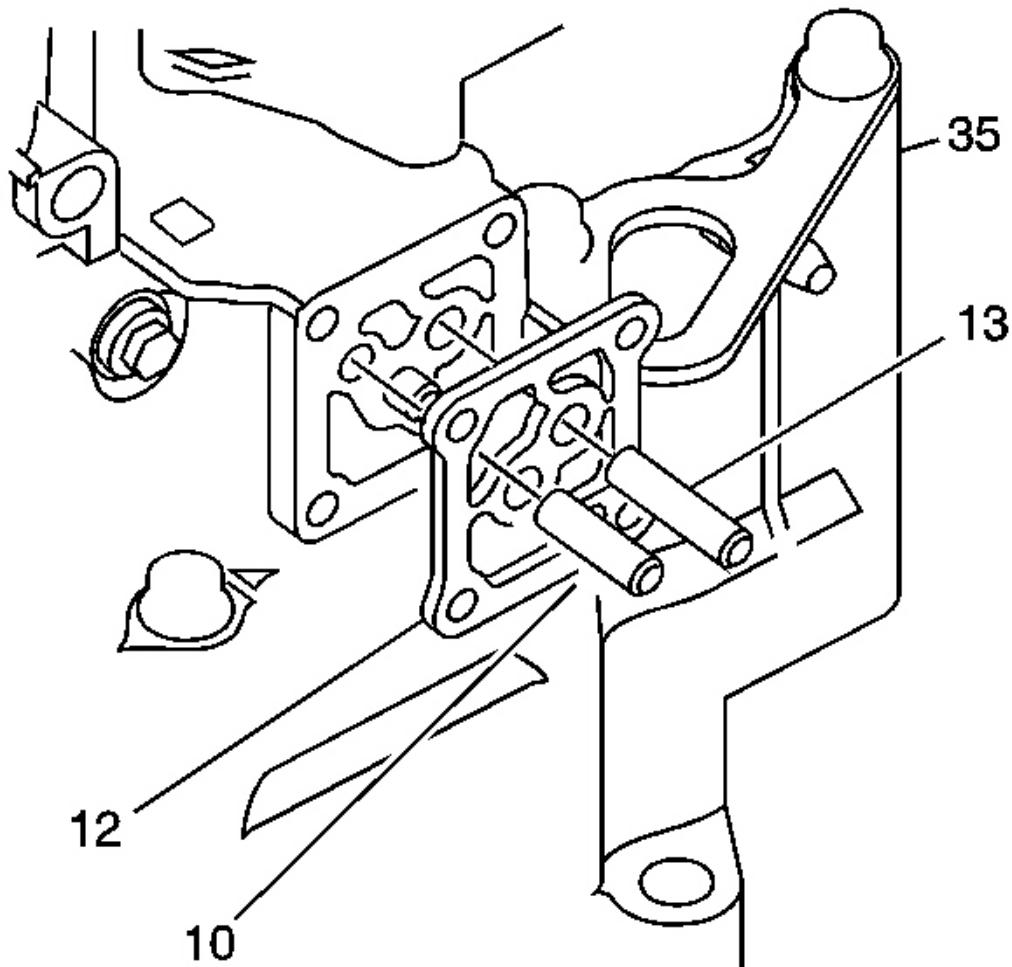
TCC Lock-Up Pressure Control Solenoid Fluid Apply Passage Pipe & Solenoid Gasket
